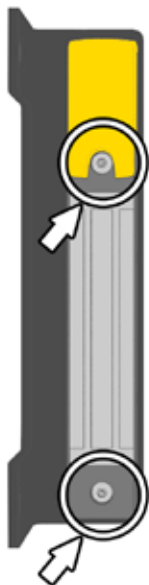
Attach the magnetic guard lock to the mounting plate and tighten the Torx screws M6 x 25 mm.
